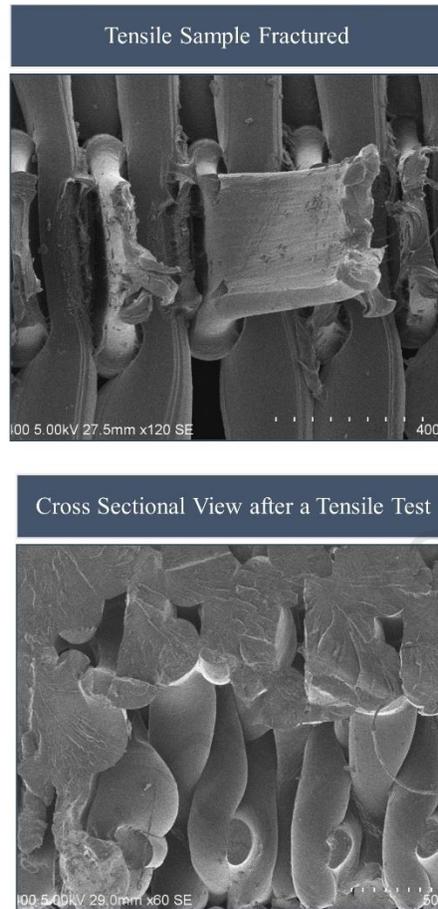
SEM Fractography of a 3D printed polymeric sample after a tensile test (Cross sectional view)
